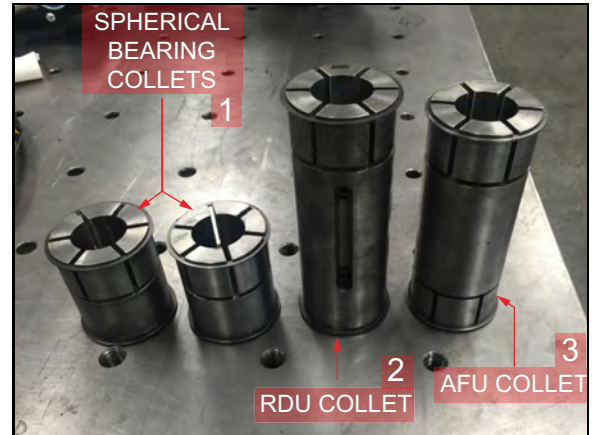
COLLETS (BB5000 VERSION SHOWN)
